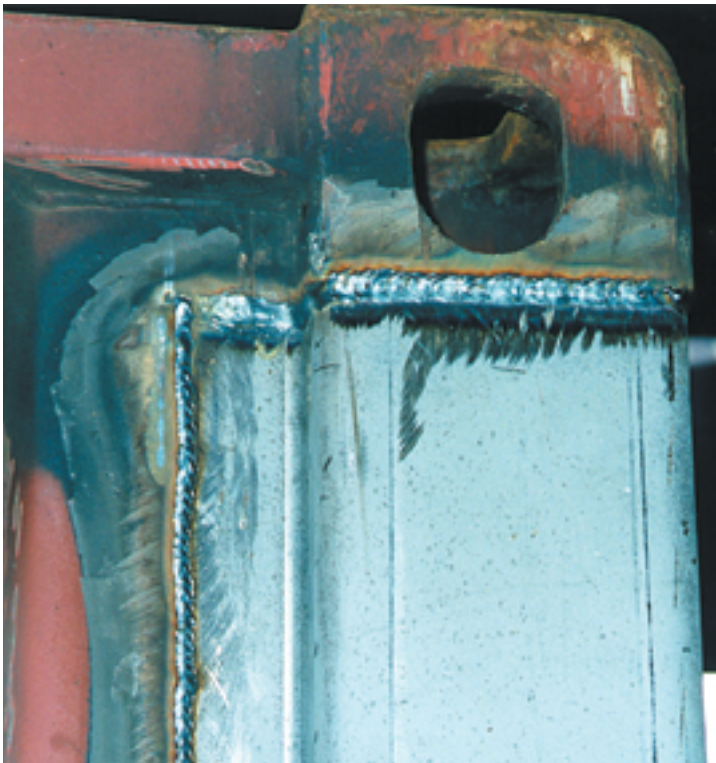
(to right) / Skip welding of interior of corner post/ panel lap joint
